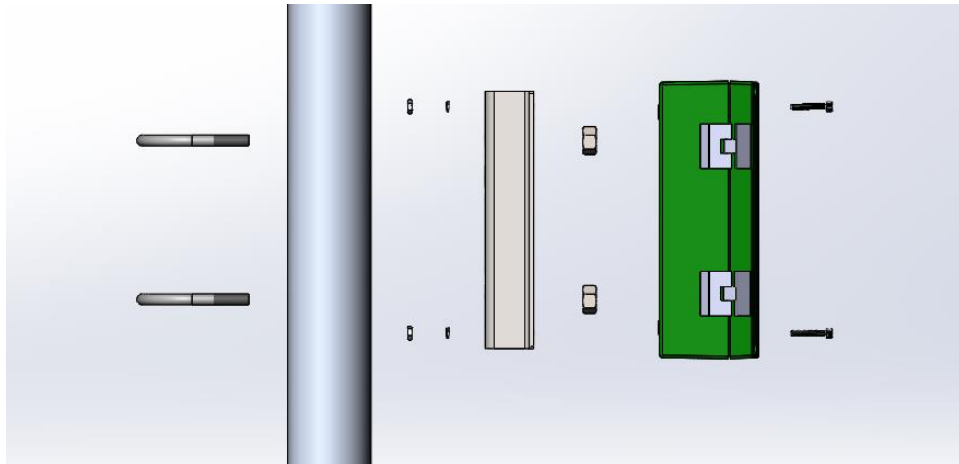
Exploded Side View of Pipe Mounting Bracket Assembly
